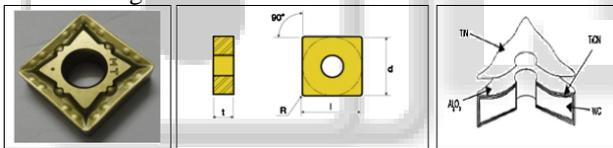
Geometry, schematic view and cross section of SNMG 120408 MT TT5100 insert
